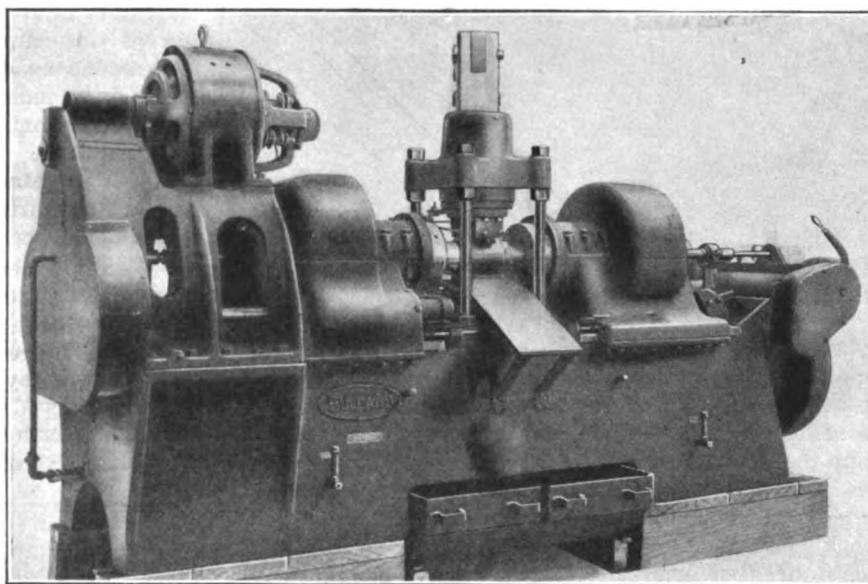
BULLARD MACHINE FOR BORING LARGE PIPE COUPLINGS
